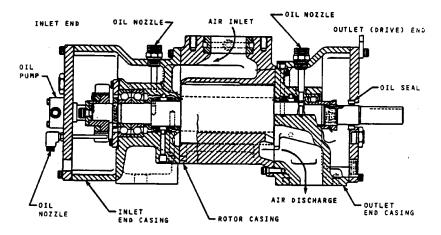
Sectional View, Elevation - Helical Screw Compressor
